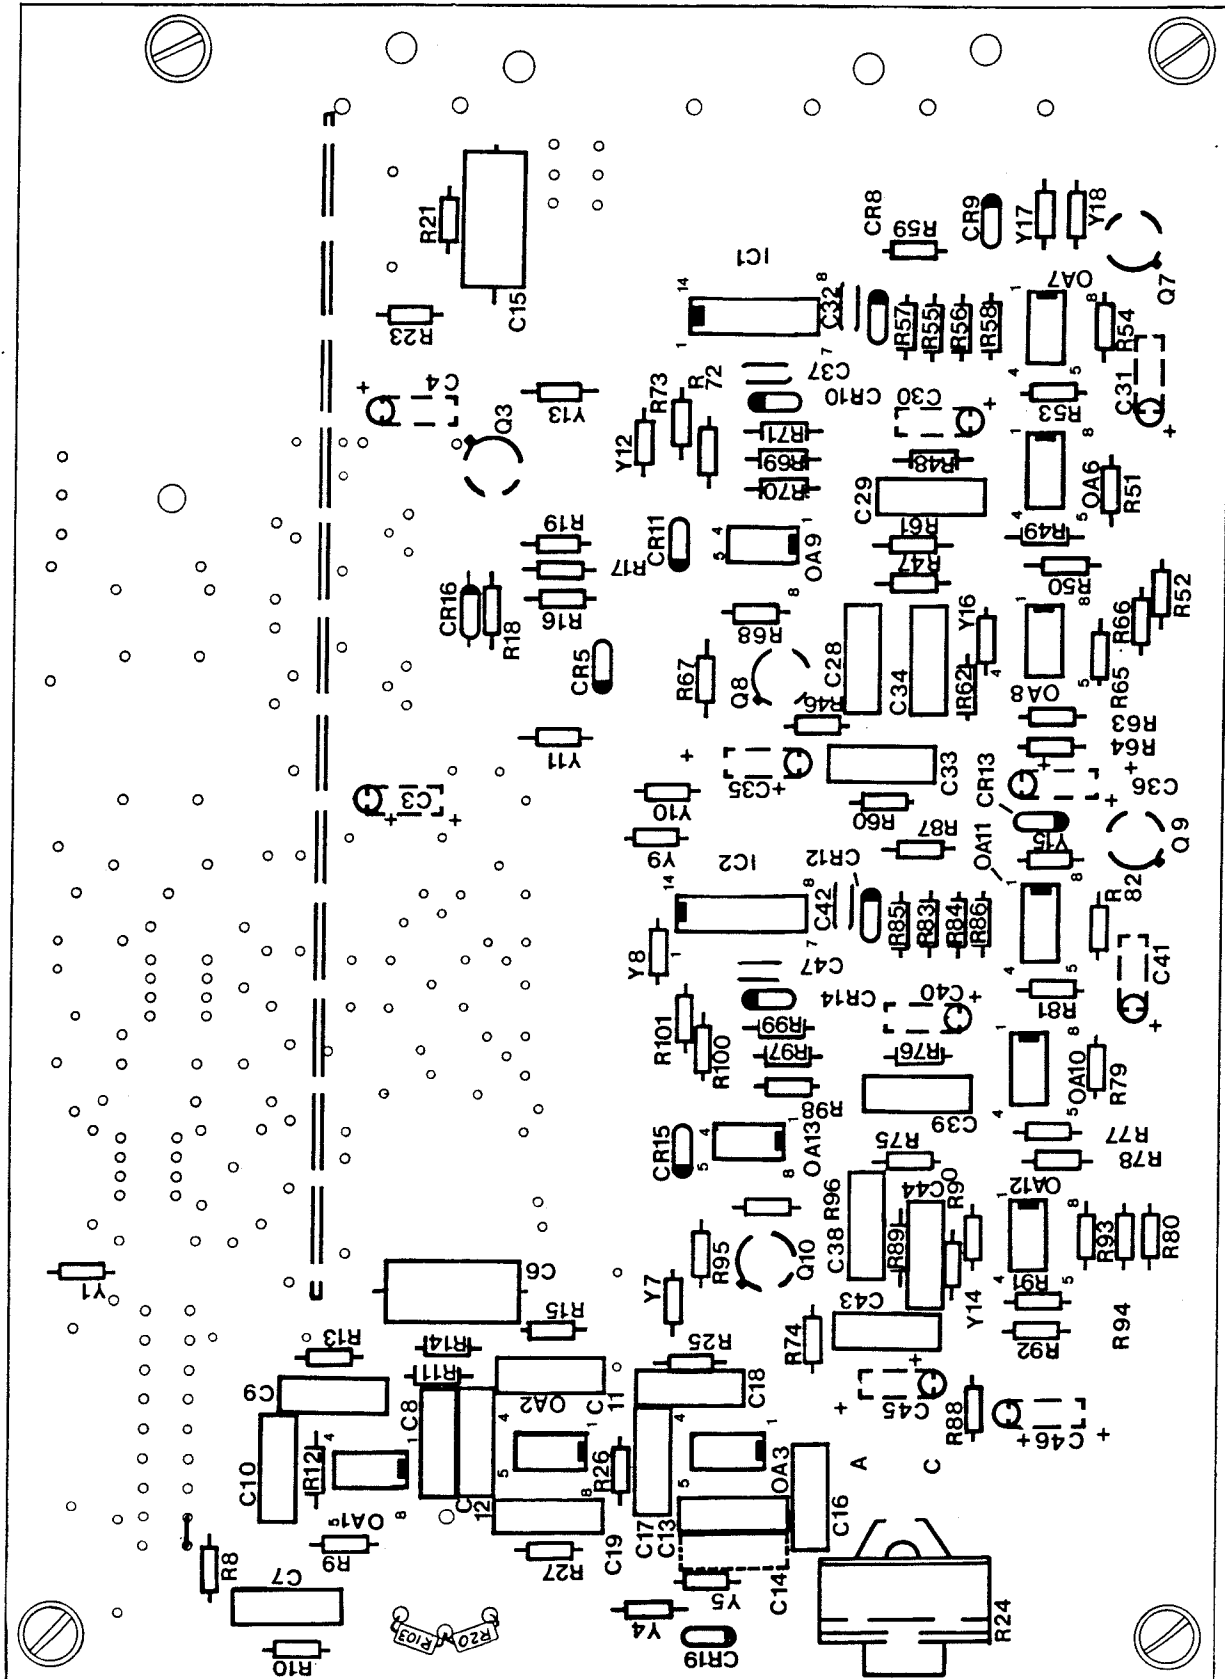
B BOARD LAYOUT OF THE KT-24
